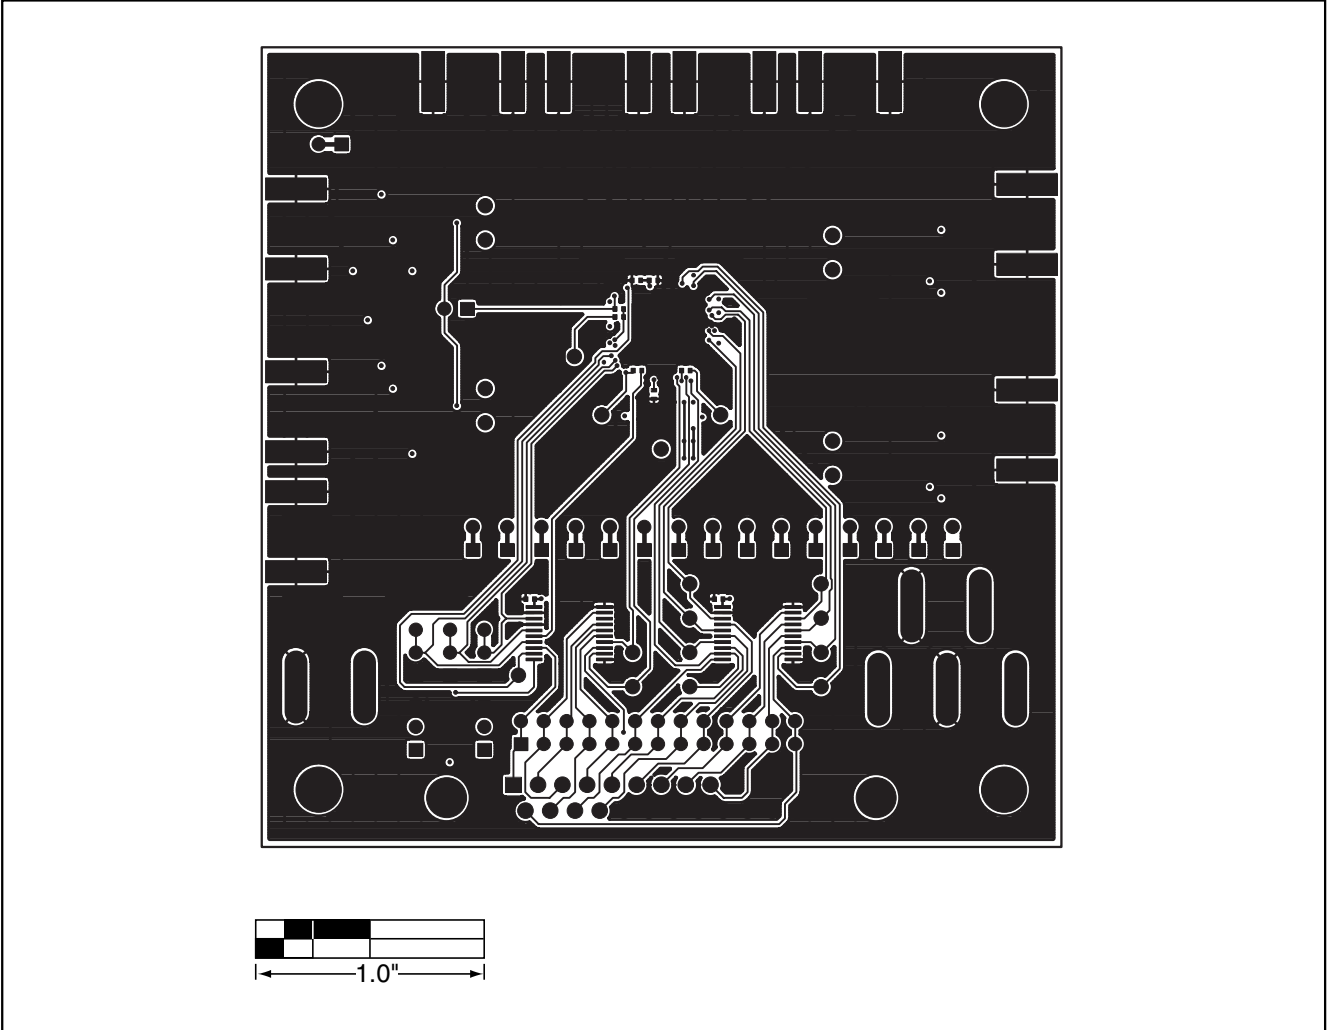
MAX2825/MAX2826/MAX2827 EV Kit PC Board Layout—Solder Side
